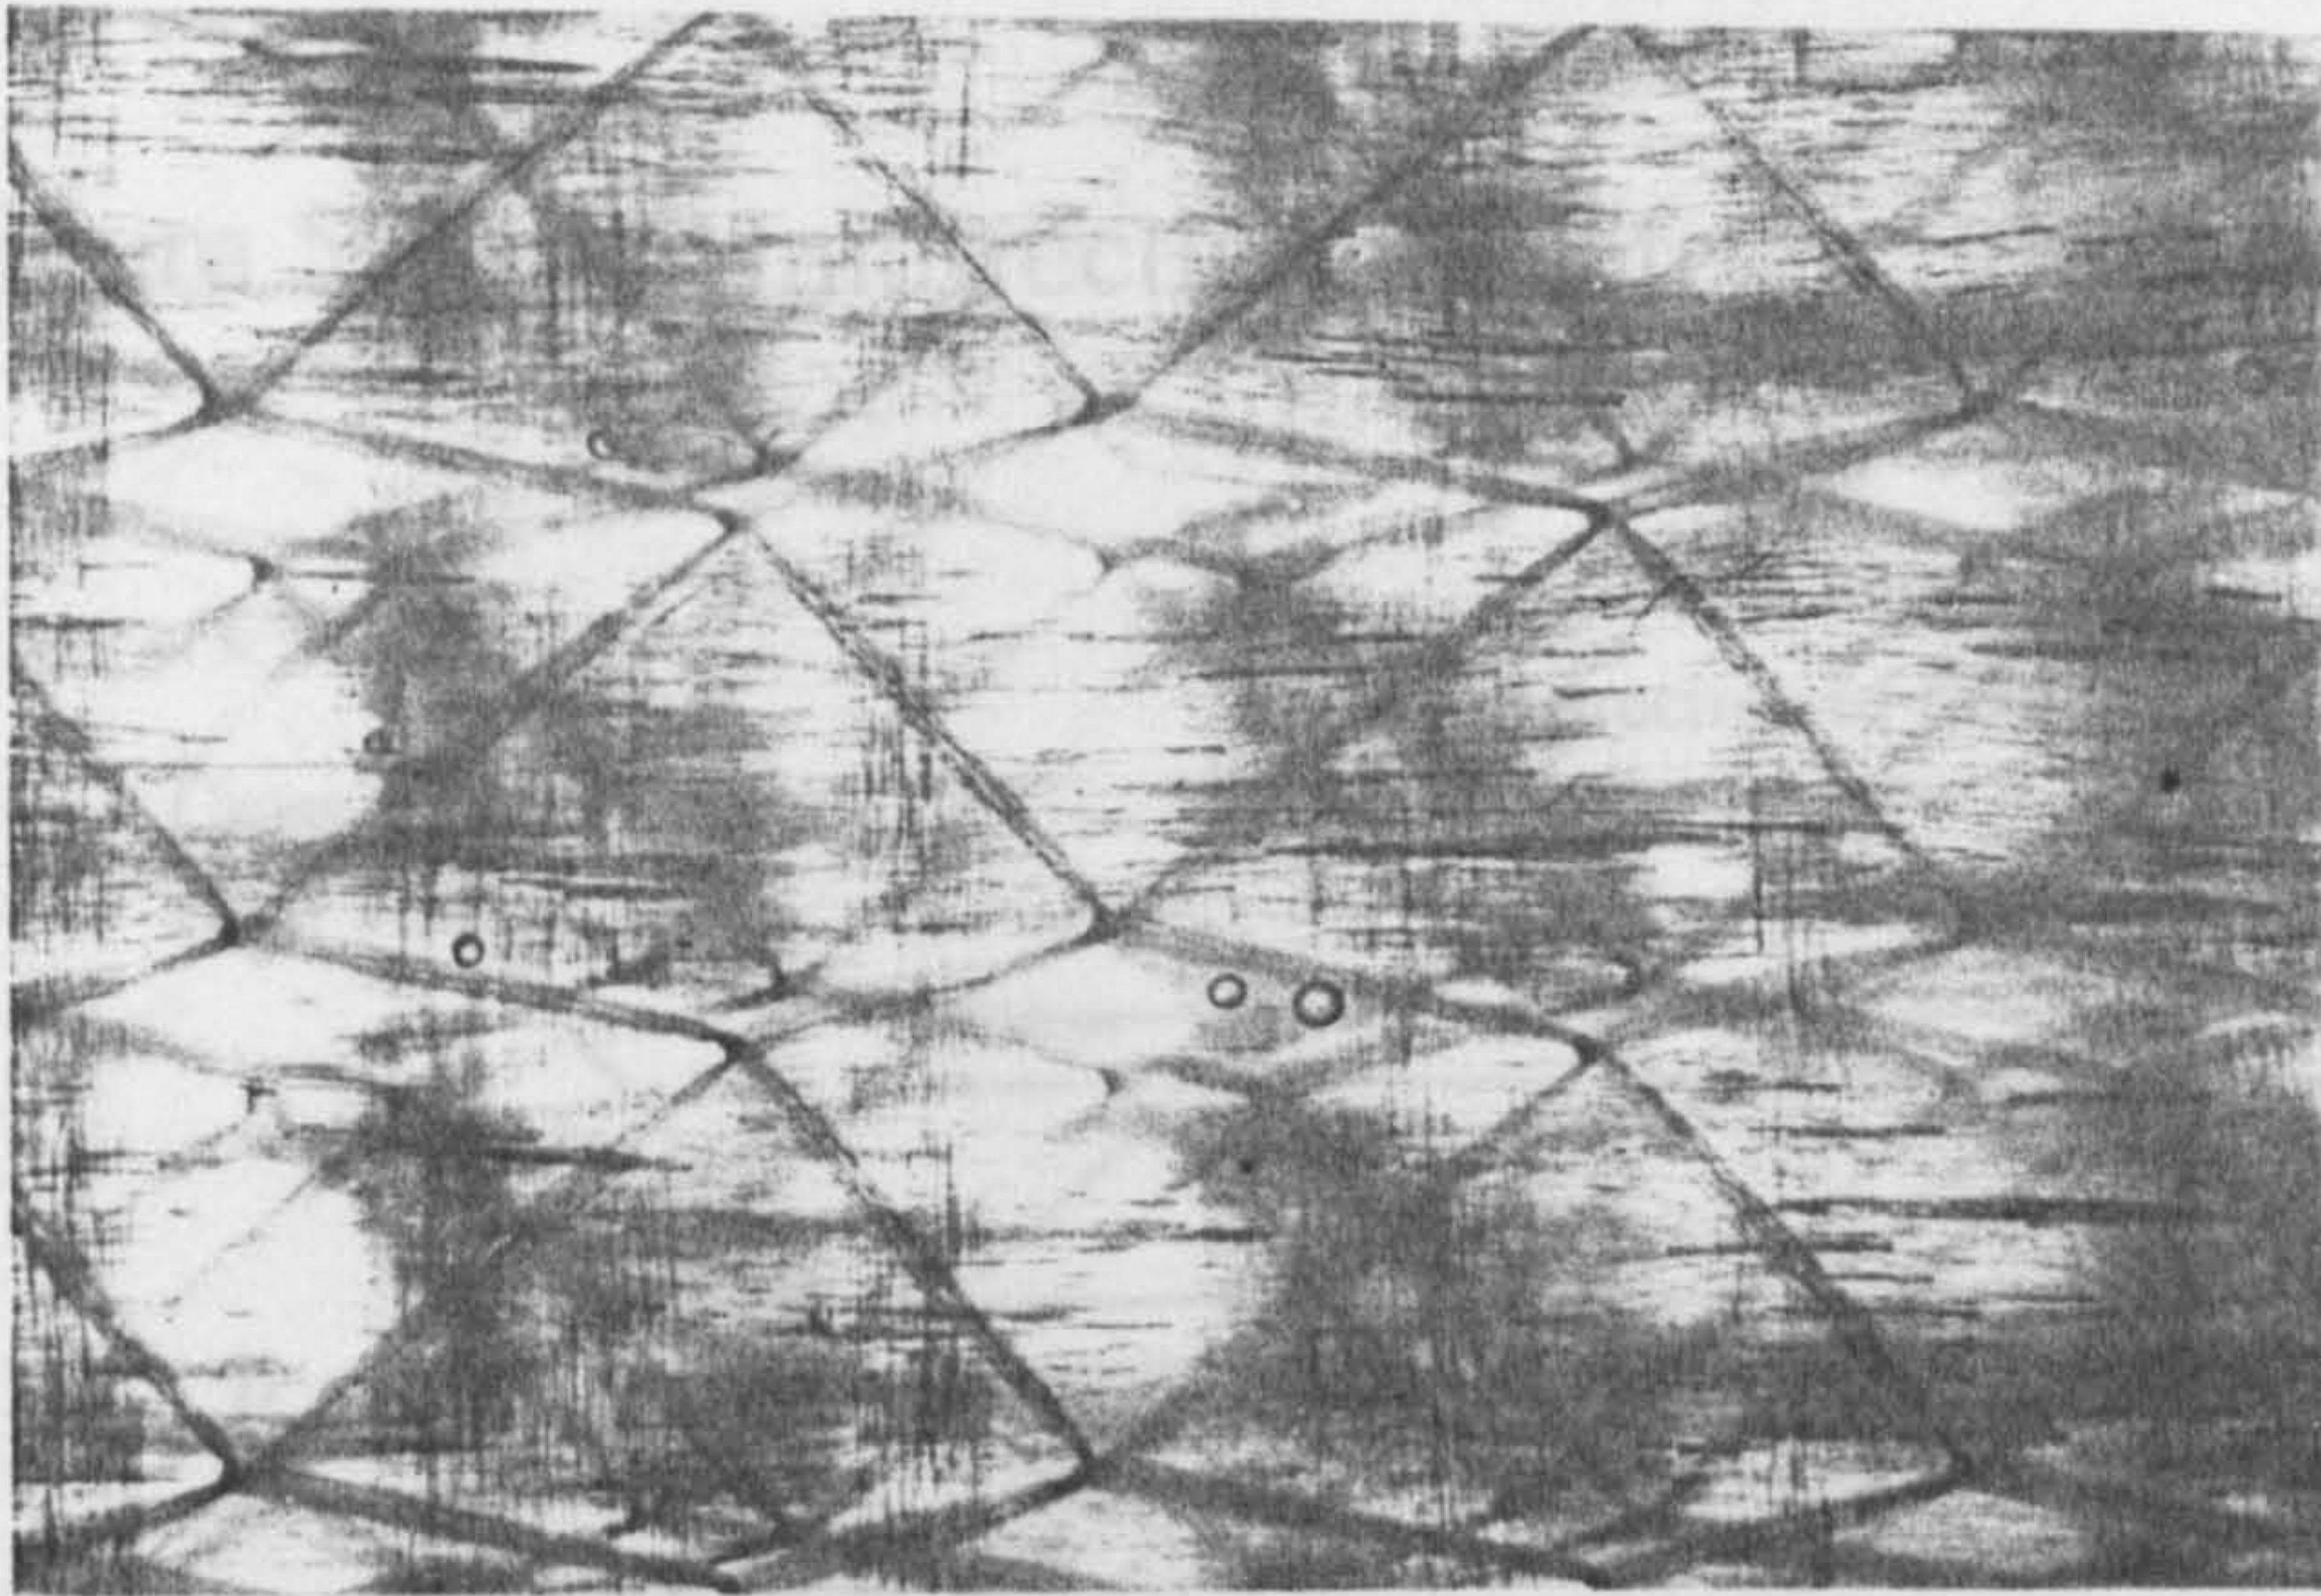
(a) Transmitted light photograph of moulding 4285, manufactured using the mid-range process conditions of 2 bar injection pressure, 90° mould temperature and using a 33% glass volume fraction preform (x7).
